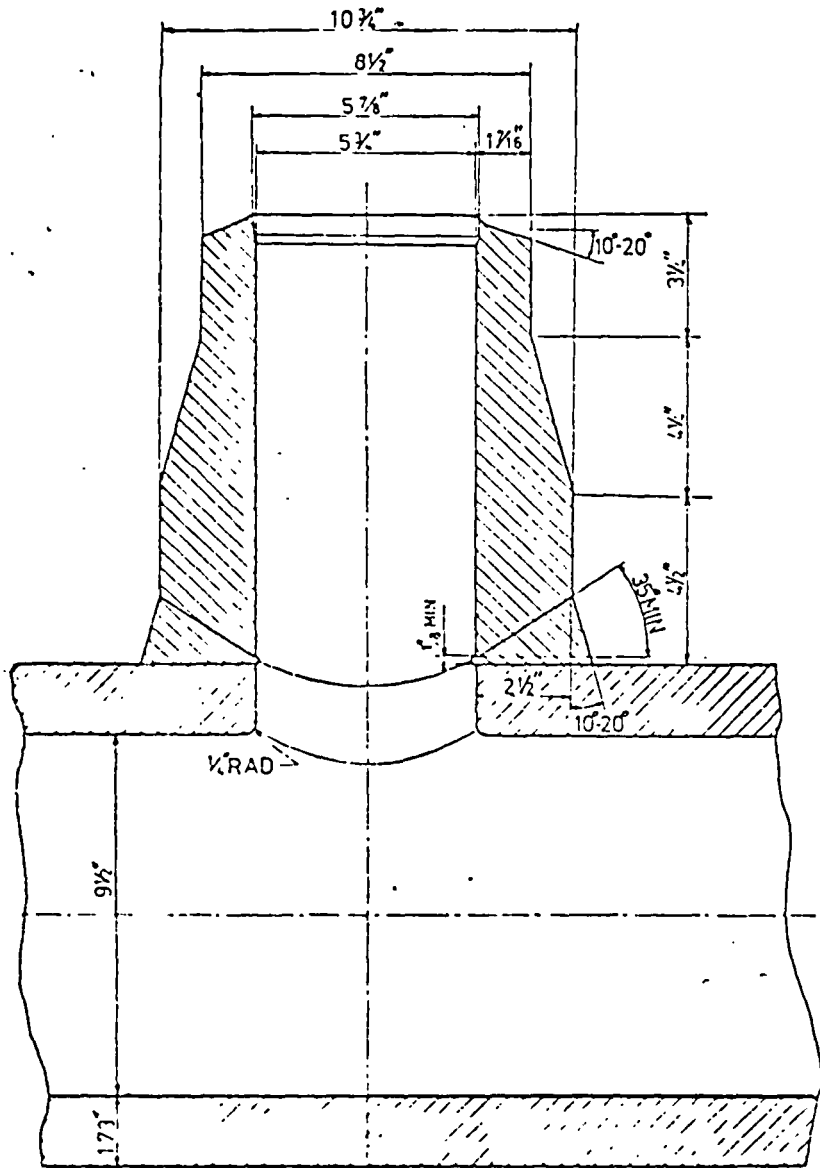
Specification of geometric details of a main steam vent pipe "T-piece"
